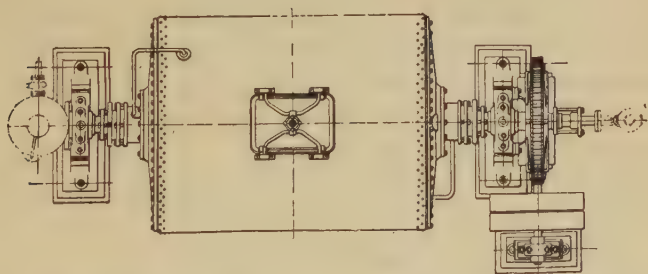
Xanthating Drum Plan View. (Courtesy of Ezio Pensotti, Milano.)
